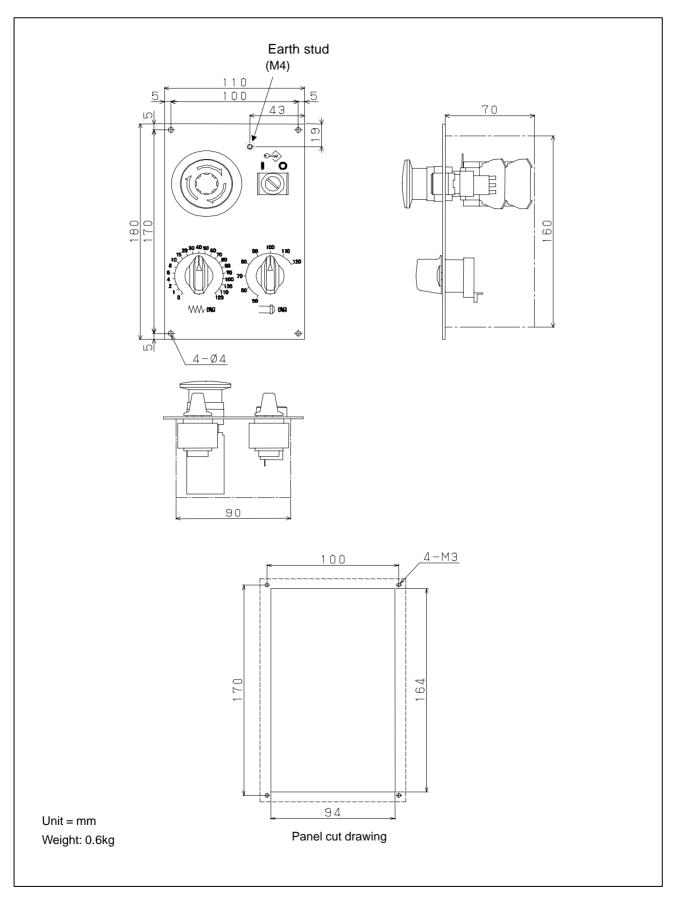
Machine operator's panel (Sub panel B1) Specification No. : A02B–0236–C235
